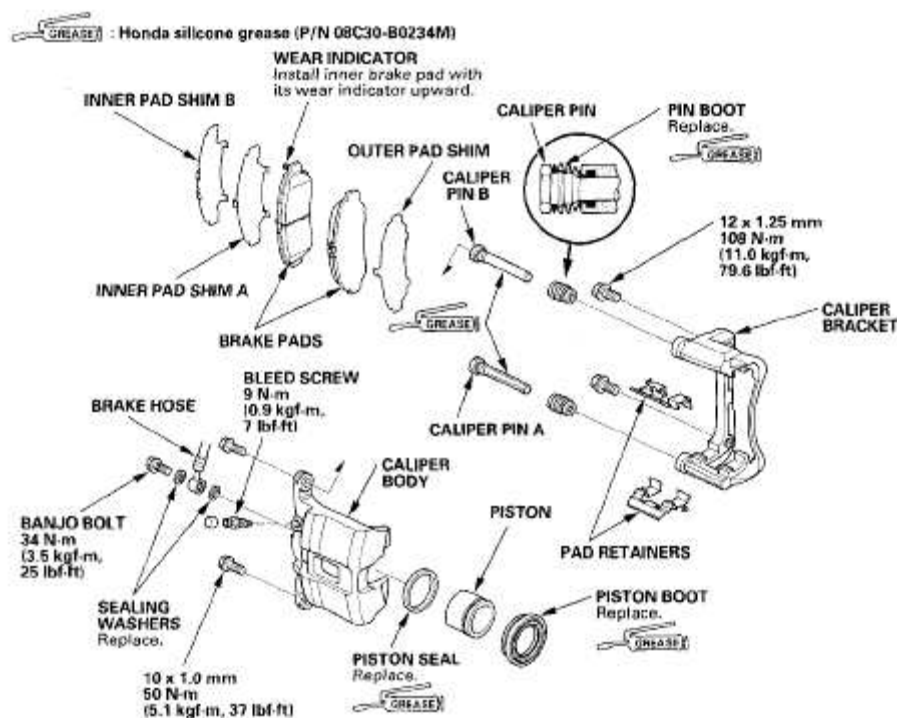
Exploded View Off Front Brake Caliper (With Torque Specifications)
